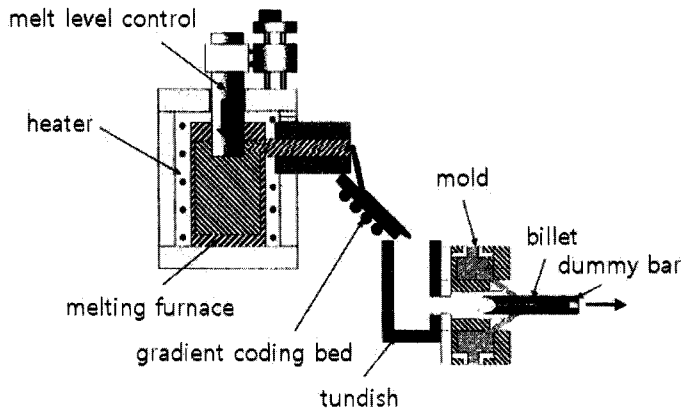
Continuous casting equipment of semi-solid slurry formed on gradient cooling bed.
